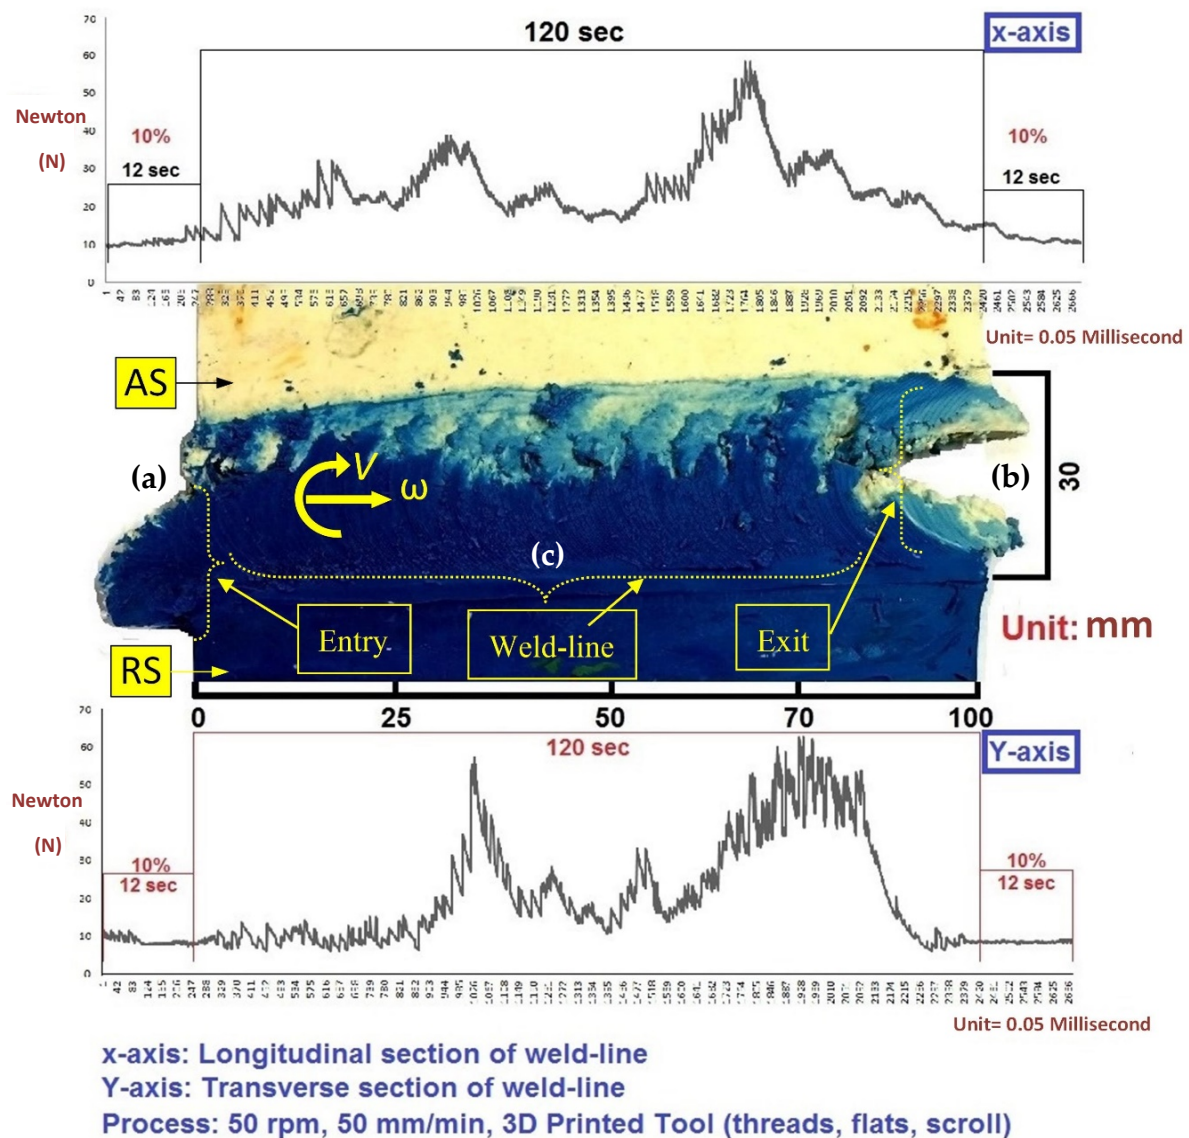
Photograph of the bobbin friction stir welding (BFSW) section sample (top surface): plasticine analogue model. (a) Entry zone of weld. (b) Exit zone of weld. (c) Weld-line body, through the weld-line.
